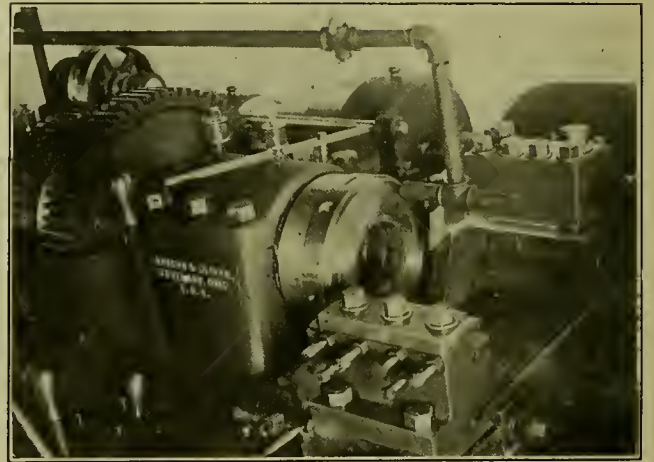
COMBINED FORMING AND CUTTING-OFF TOOL SLIDES.
